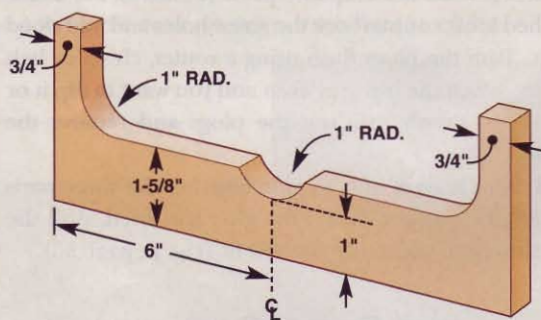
FIGURE D WORKBENCH VISE MOUNTING BOARD DETAIL
